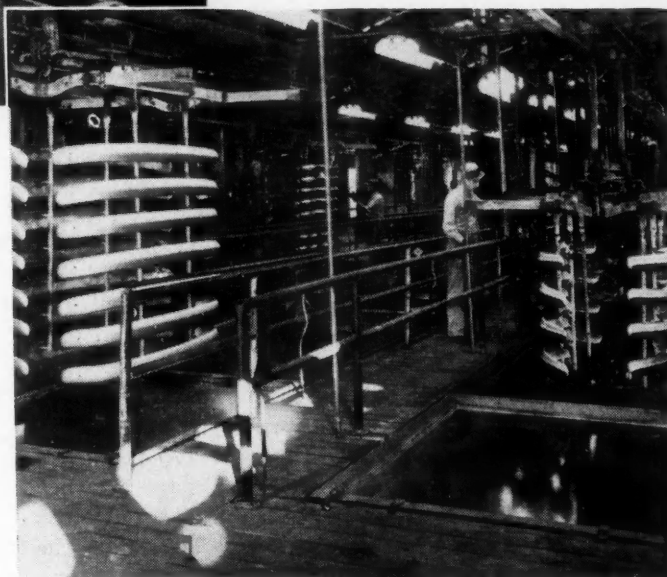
(Left) Fixture-type conveyor for transporting bumpers under automatic polishing wheels.
